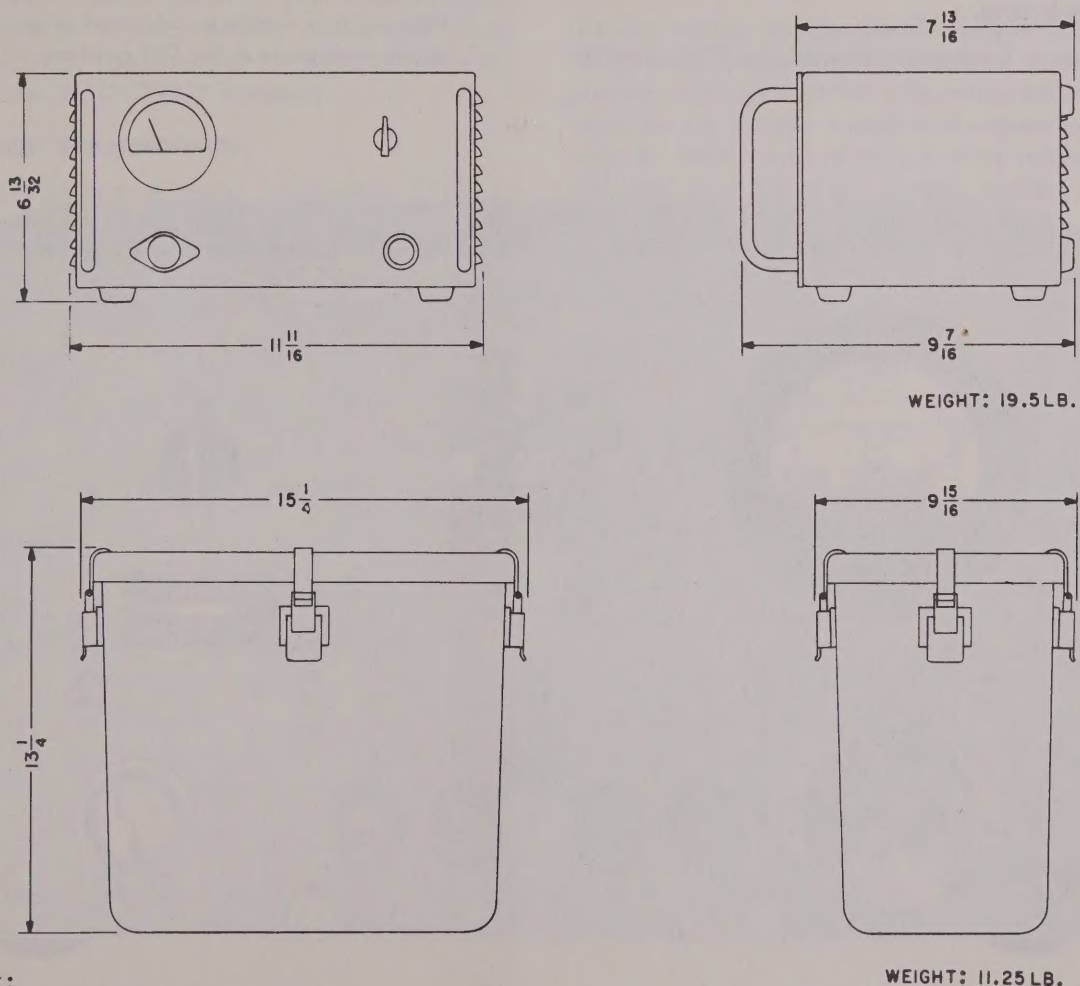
Outline Dimensions of Power Supply ARC Type P-13 and Carrying Case ARC-18028
